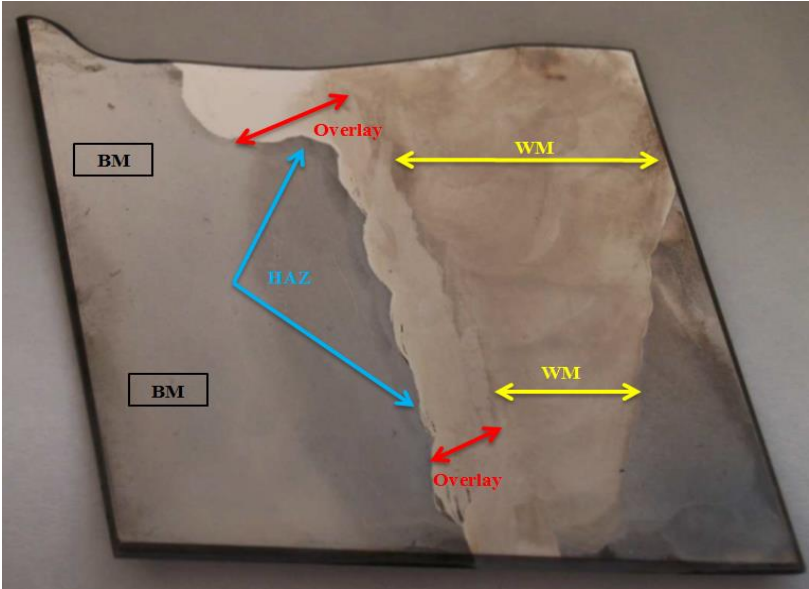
Macrograph showing different location of the weld joint.
